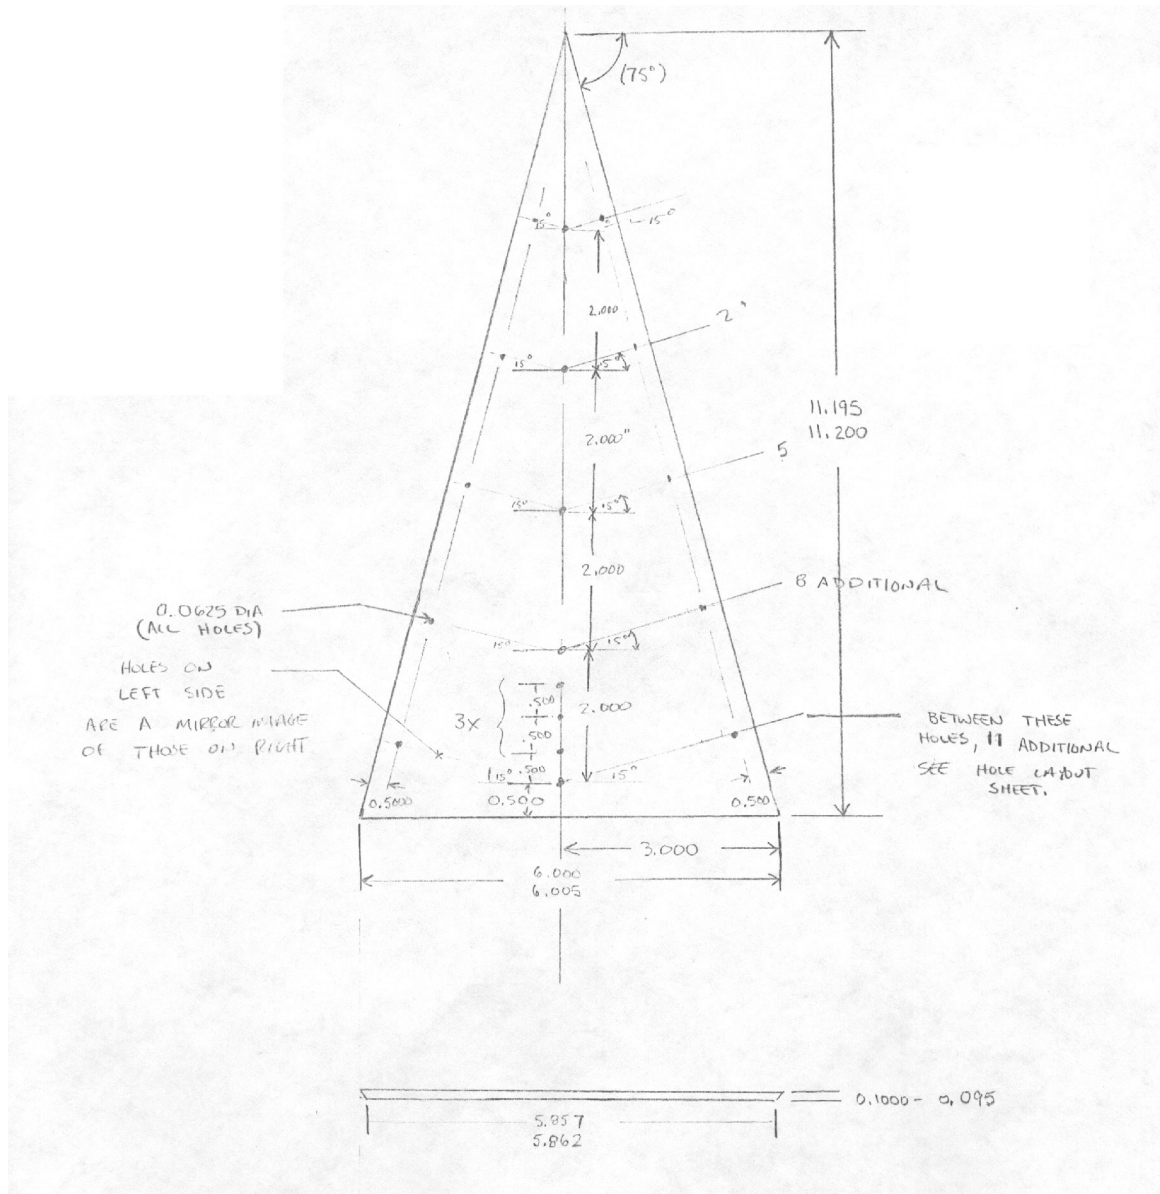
Mechanical drawing for the 0.28-meter chord model. Sheet 1- Top View.
